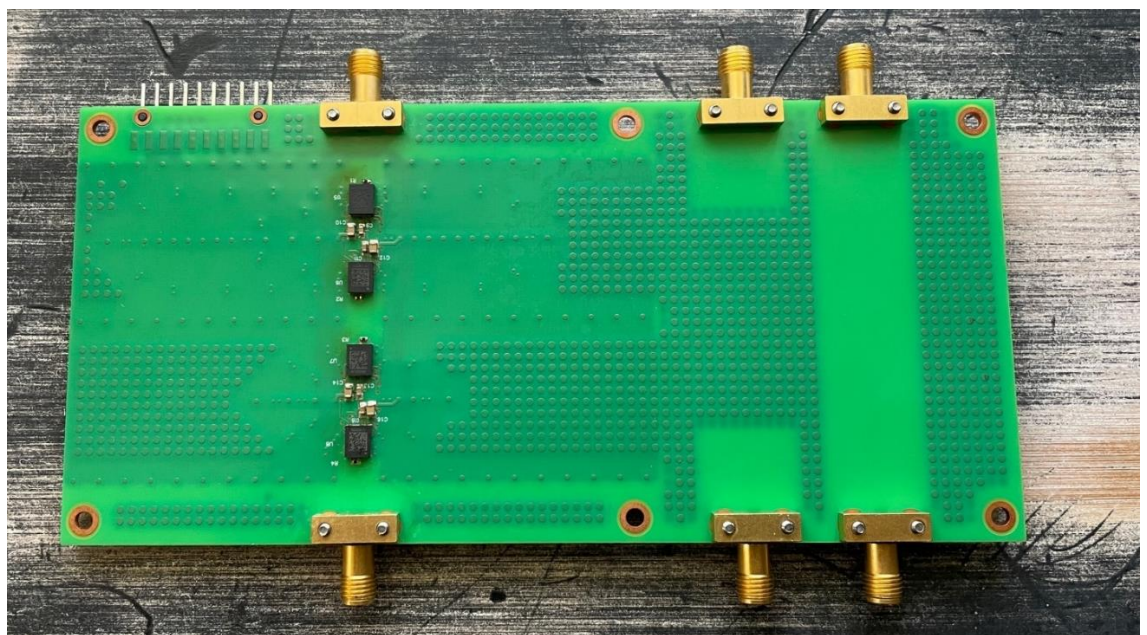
Finished PCB – Bottom side showing RF MEMS switches.
